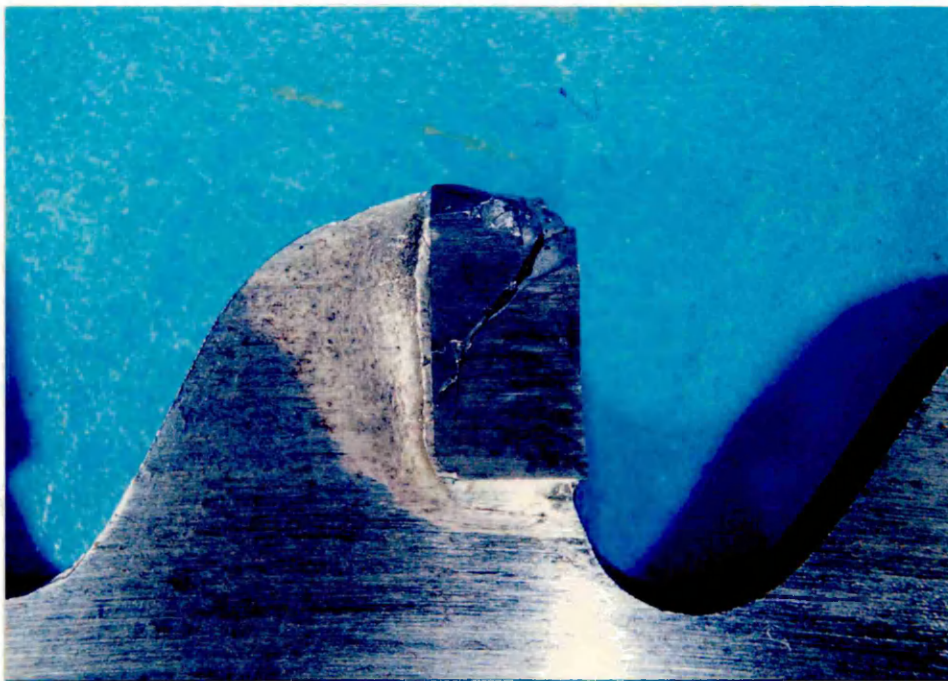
shows breakage and stripping occurred on the tooth tip
